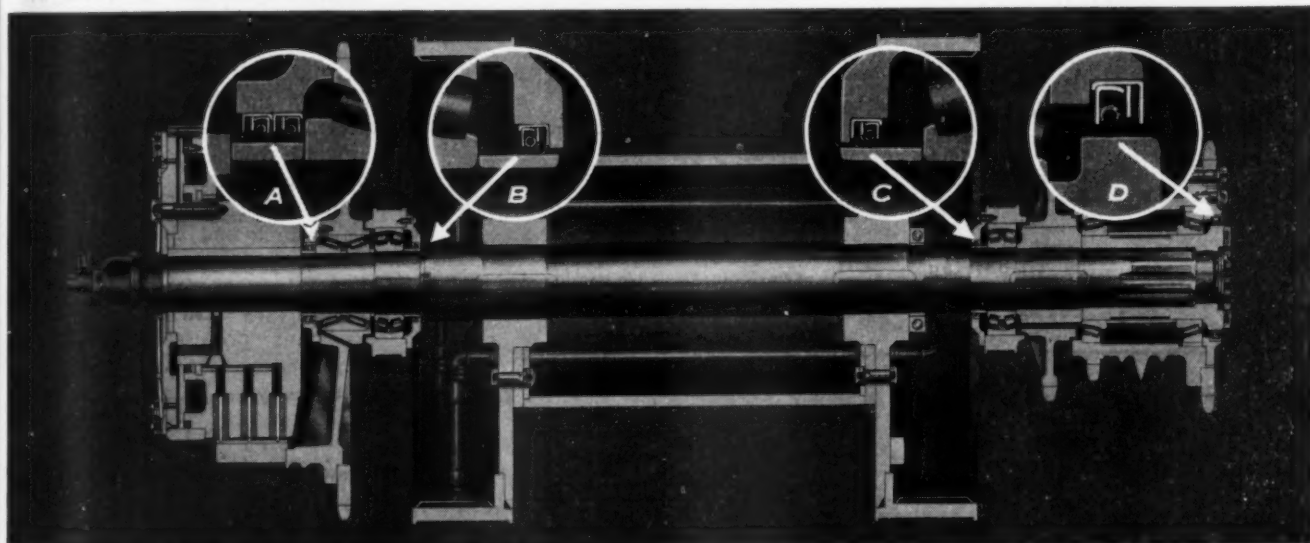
Cut-away drawing showing position of five oil seals on main hoist drum shaft assembly of Emsco "GB-800" oil field drilling rig
